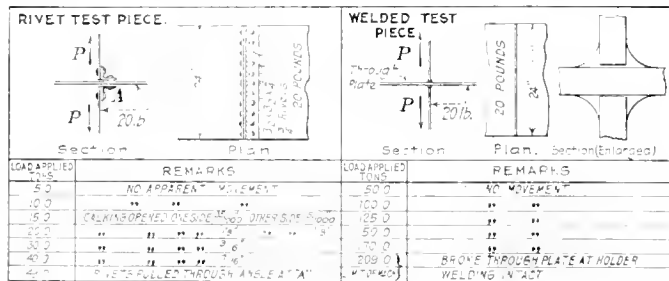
COMPARATIVE TESTS ON BEARING STRENGTH OF WELDED AND RIVETED LUG ATTACHMENT
